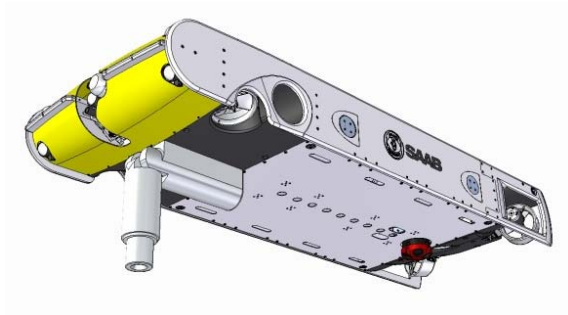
Seaeeye Sabertooth with torque tool at 90 degrees.
